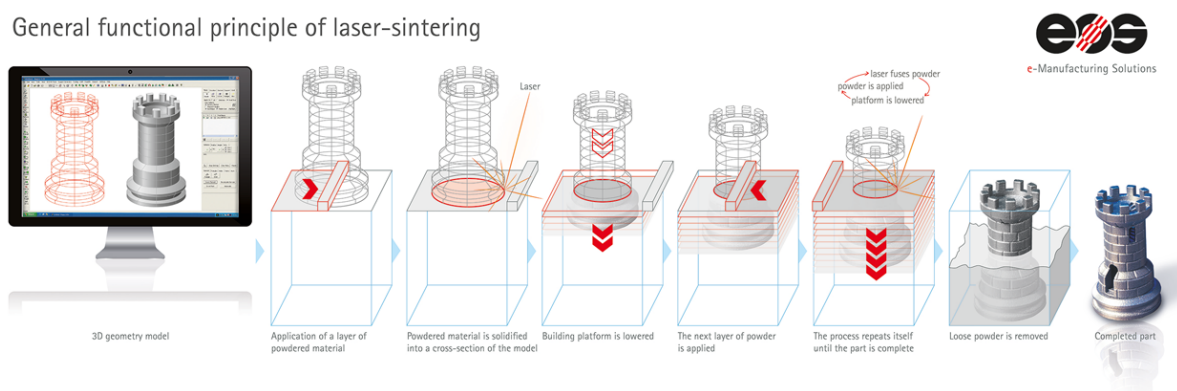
Schematic arrangement of a conventional LS machine with roller placement of powder [45]
